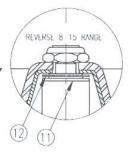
STEM ASSEMBLY REVERSE 8-15 SPRING RANGE ONLY
